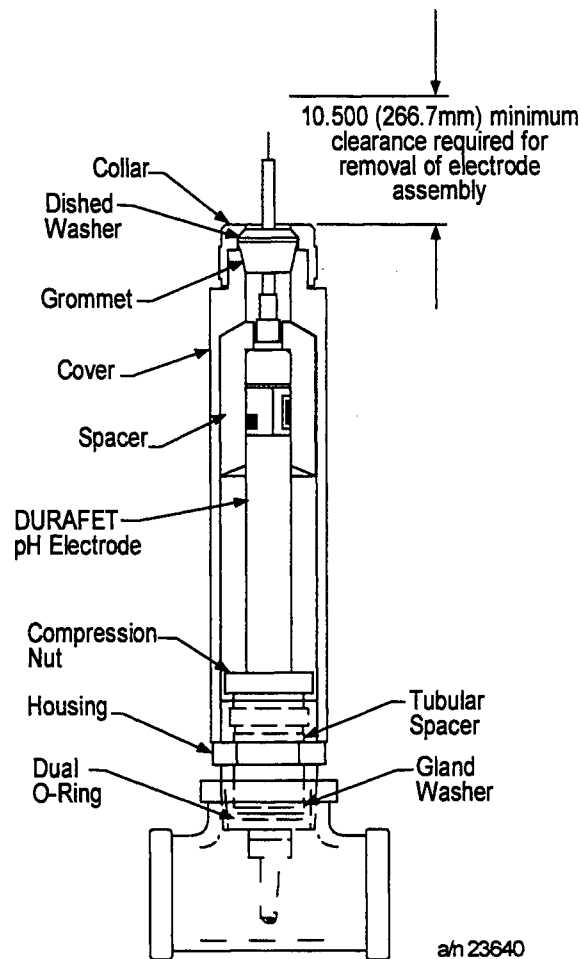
Cutaway View of Assembled Mounting (3/4" pipe tee shown is not included with mounting)
